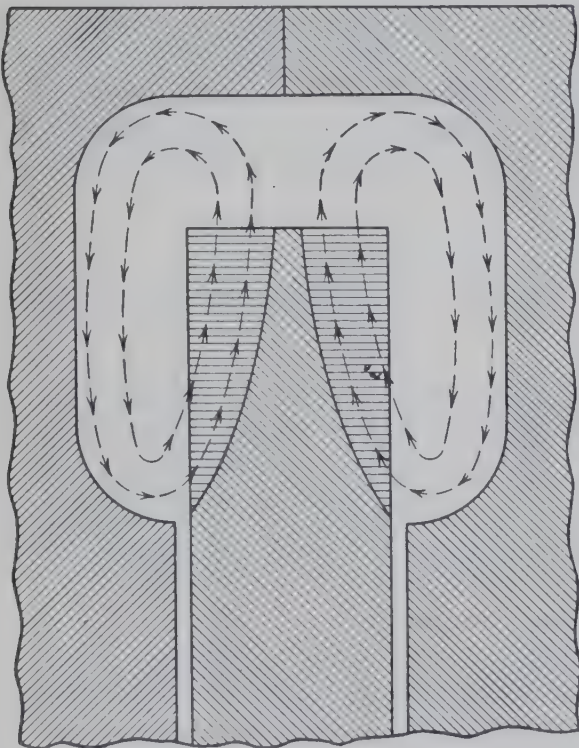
Drawing of section of fluid channel in turbine pump showing circulation. (*Aurora Pump Co.*)
